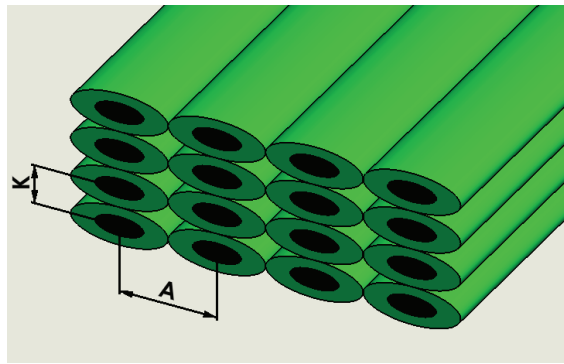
Isometric view of the sample: K – layer height; A – print line spacing
